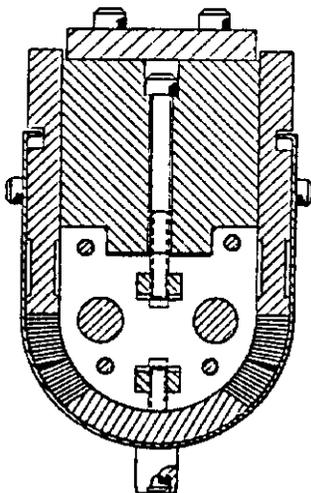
COIL ASSEMBLY WITH SIZING BARS AND RETAINER
